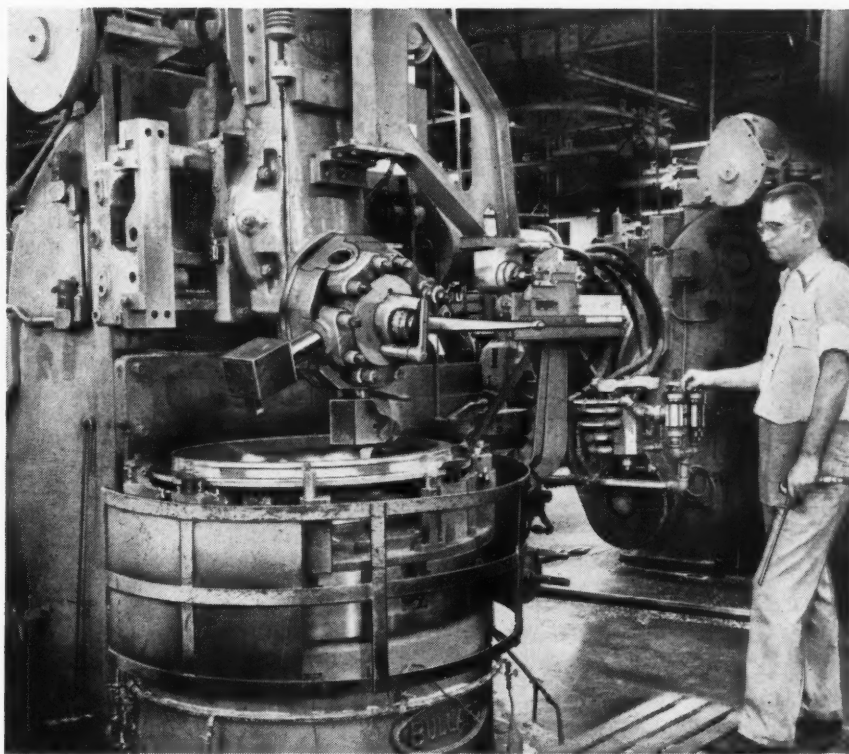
Machining the inside contour of a magnesium-alloy compressor casing for a turbo-jet engine on a vertical turret lathe equipped with a hydraulic follower
